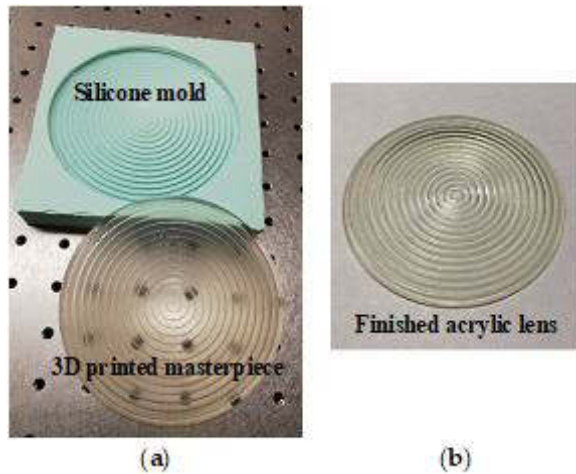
Sub-processes for pressure casting method: (a) An open-face silicone mold created by a piece; (b) Finished acrylic lens through the silicone mold
